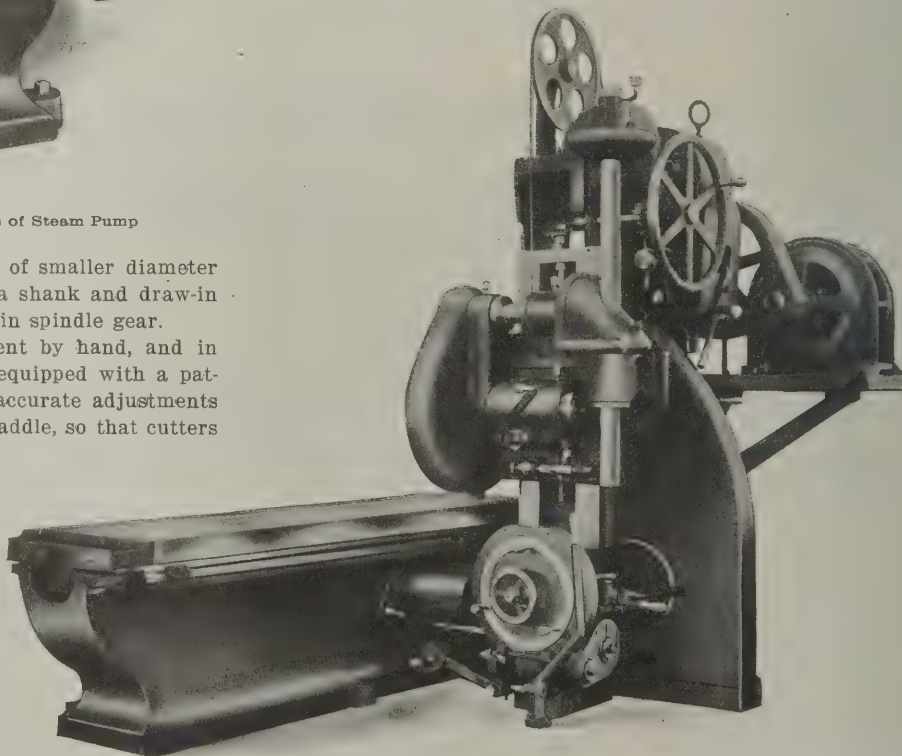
Ingersoll Open-side Horizontal-spindle Milling Machine
